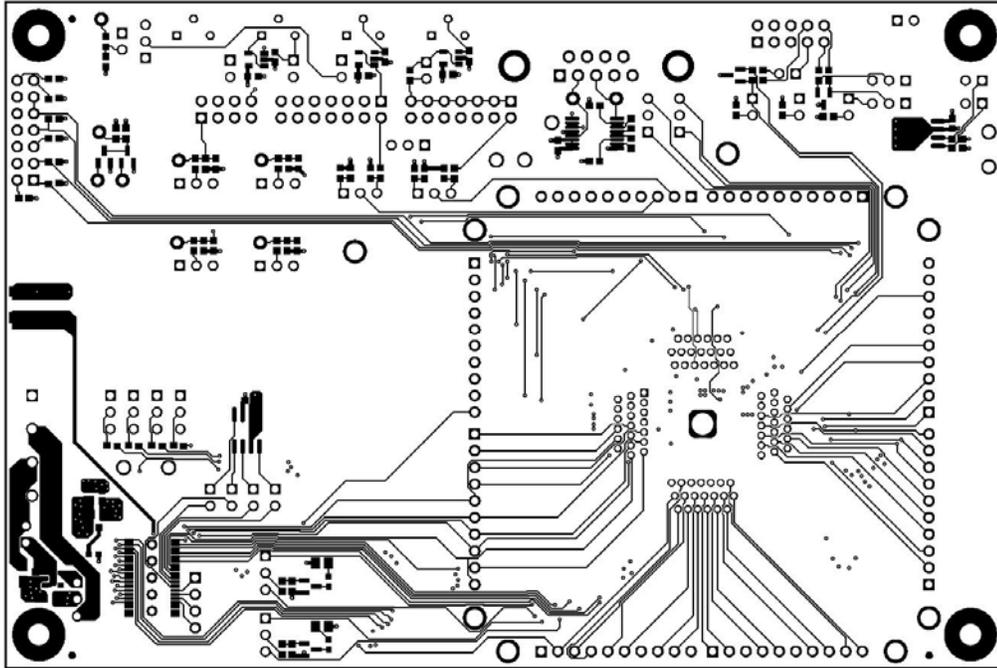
UCD3138A64OEV-662 Top Copper (Top View)
